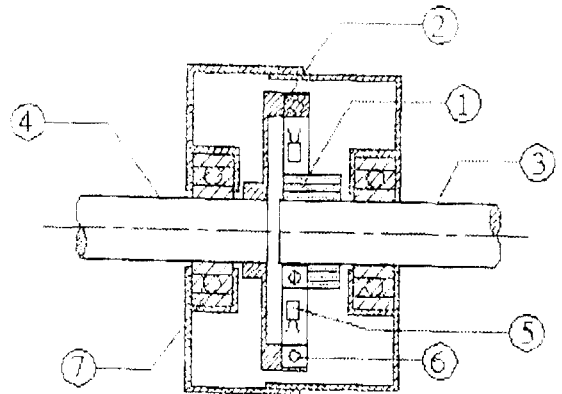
Assembly trial manufacture of cantilever type torque transducer
